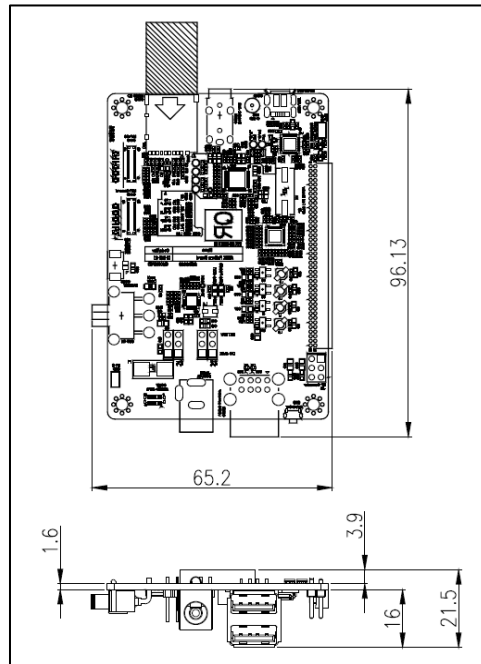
Mechanical Drawing ARTIK 530 Development Board Platform Board all dimensions are in [mm]
